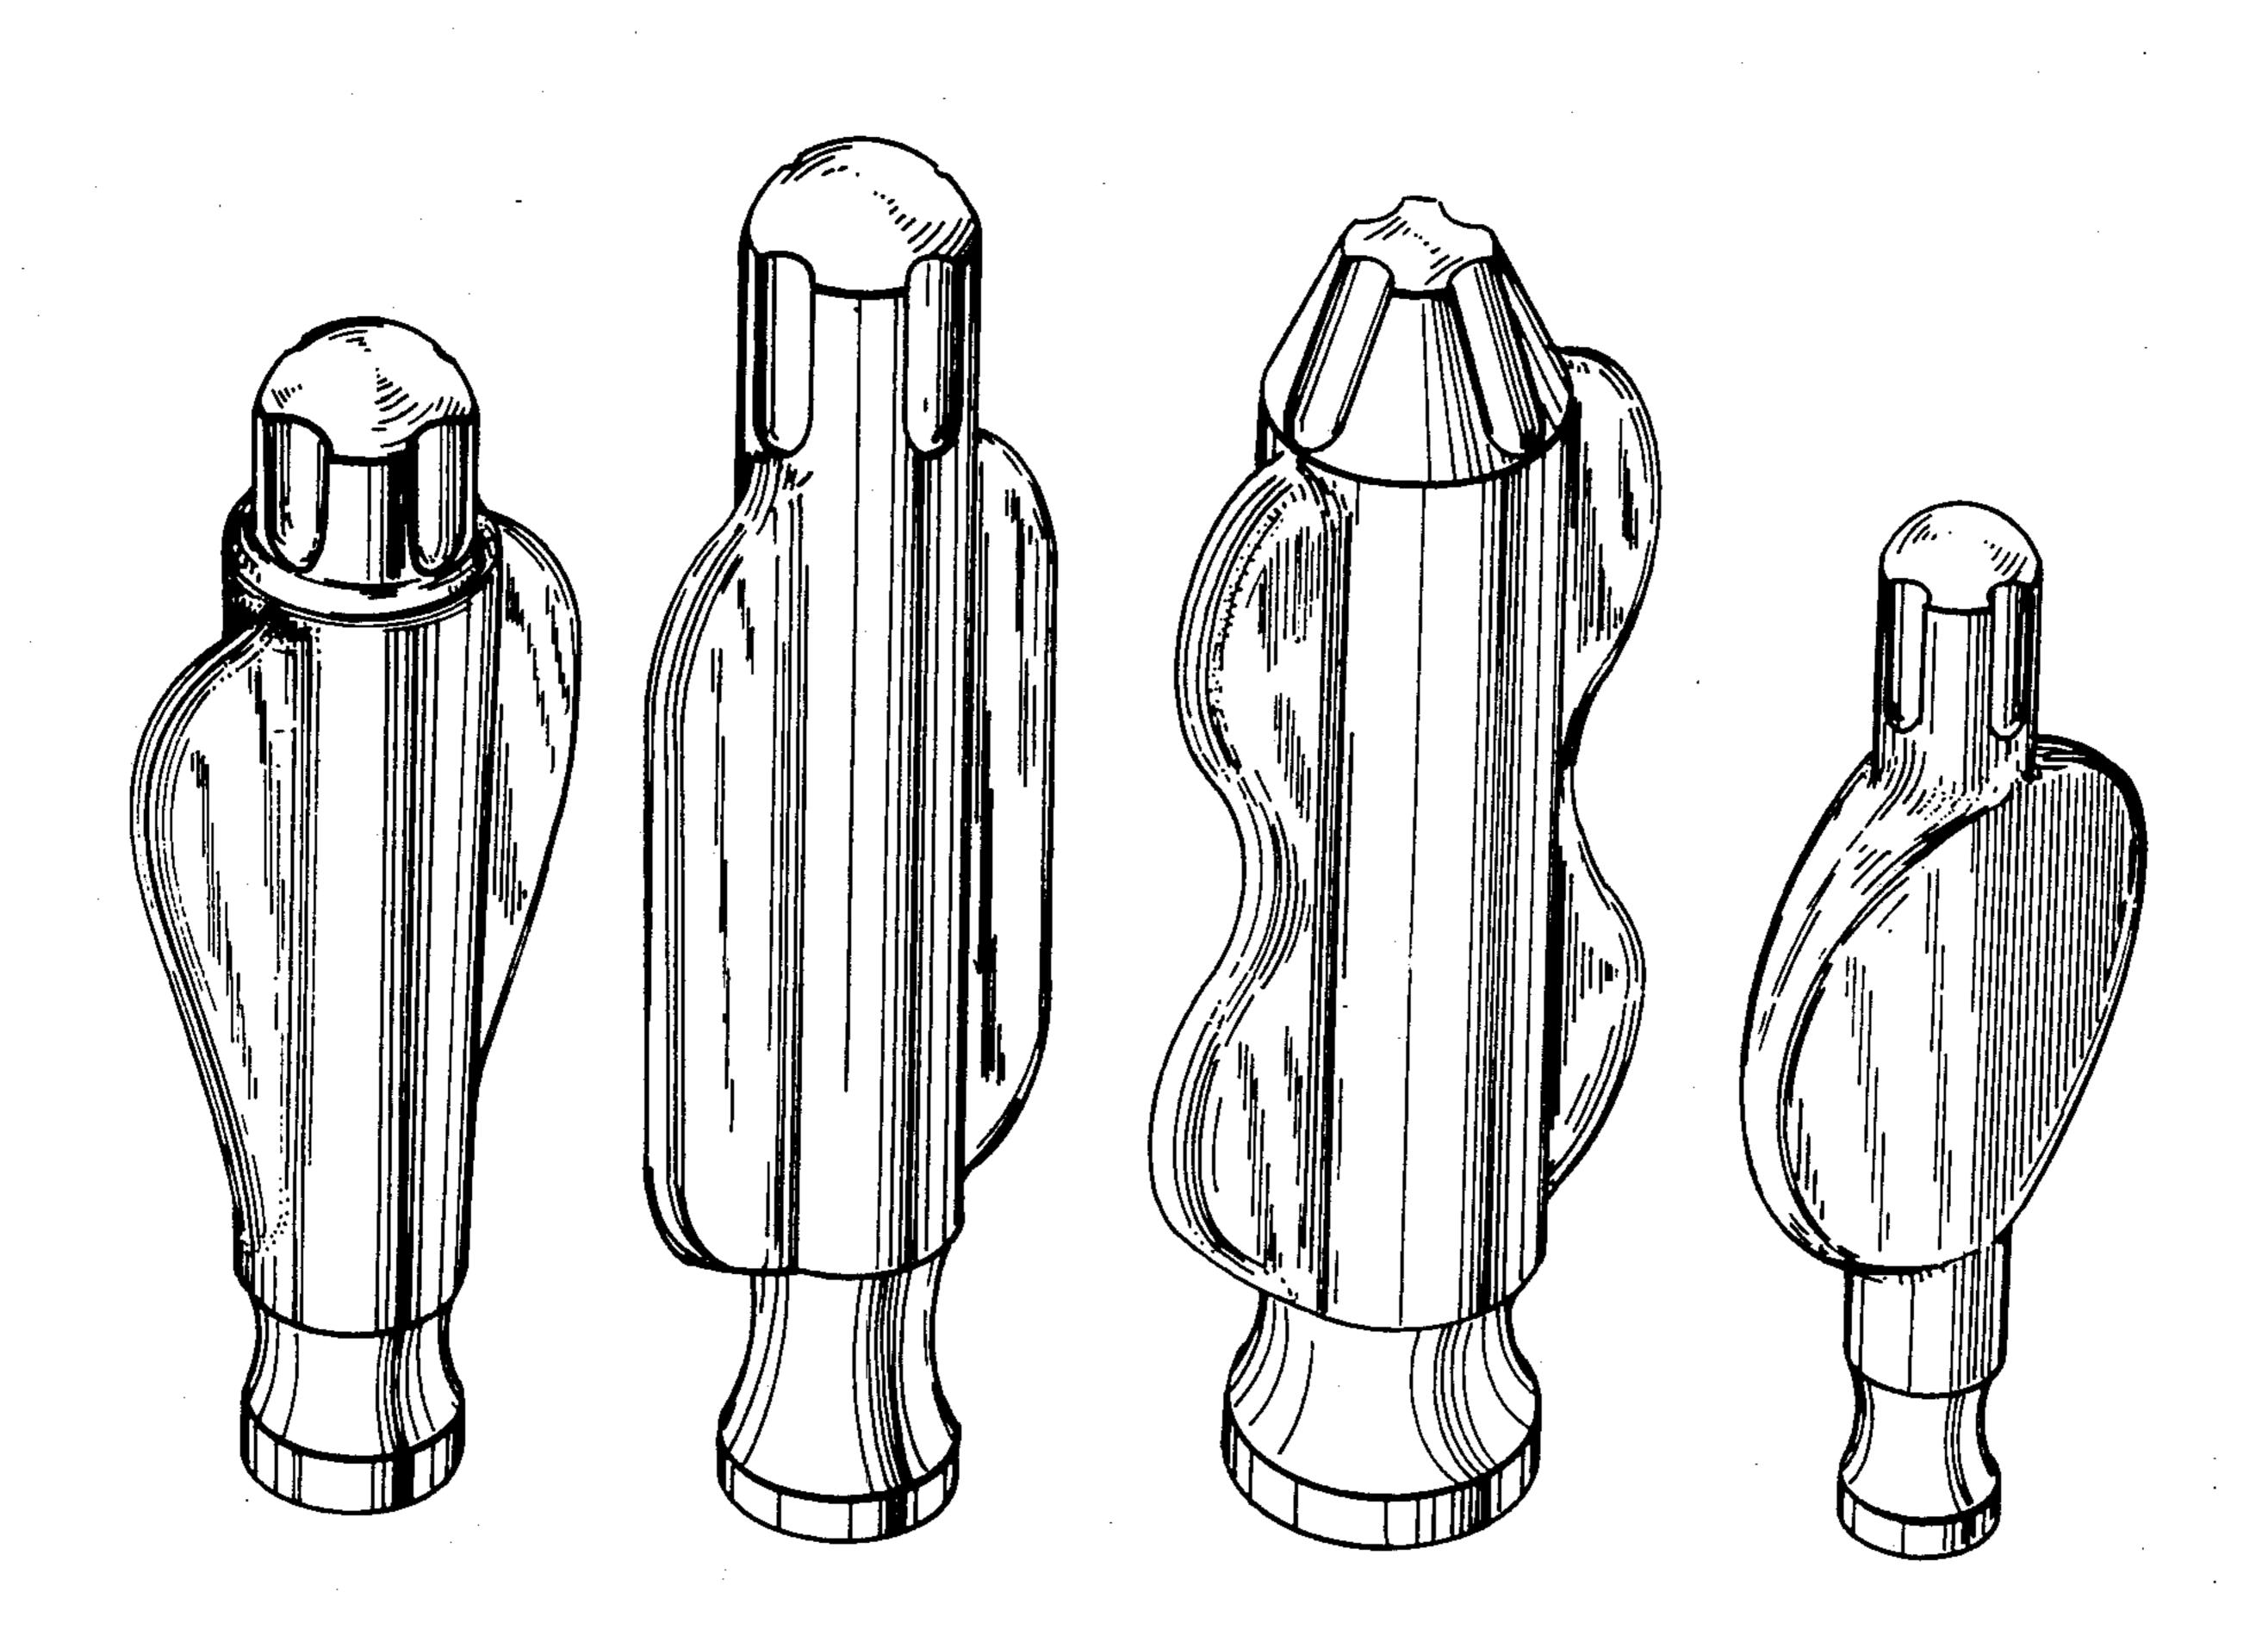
is a perspective view of a tool handle particularly useful for screwdrivers of my invention.
